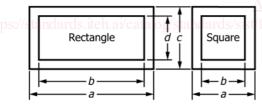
Tolerances on Distance Between Parallel Surfaces for Copper Rectangular and Square Tube (Table 7)
